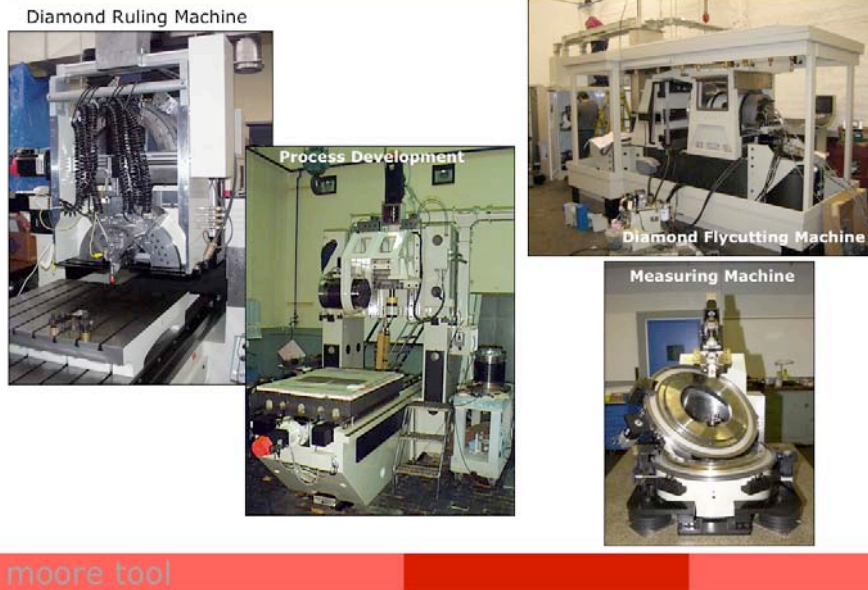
Photos of the many special purpose ultra-precision machines built by Moore Tool Co.
